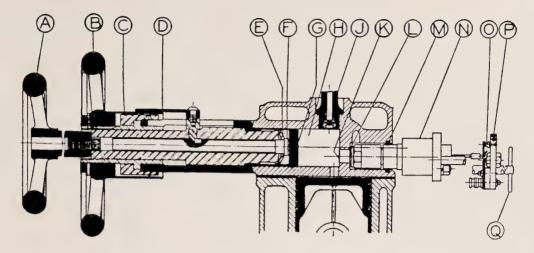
Diesel variable compression plug. Optical delay method. Cross section of cylinder head showing mechanism for varying volume of combustion chamber.
